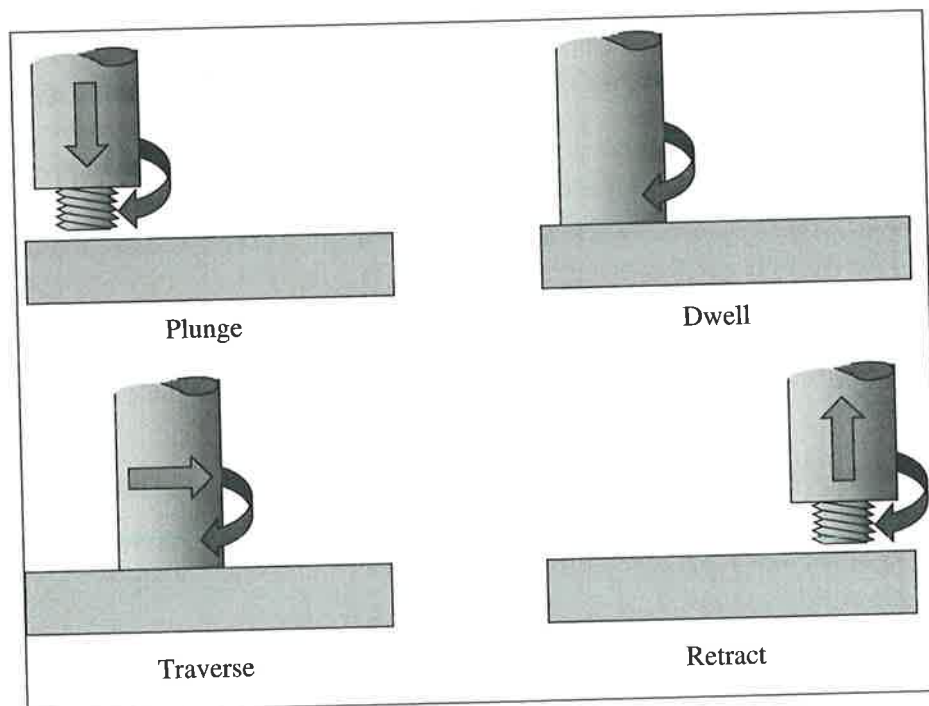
Sequence in a Friction Stir Weld
